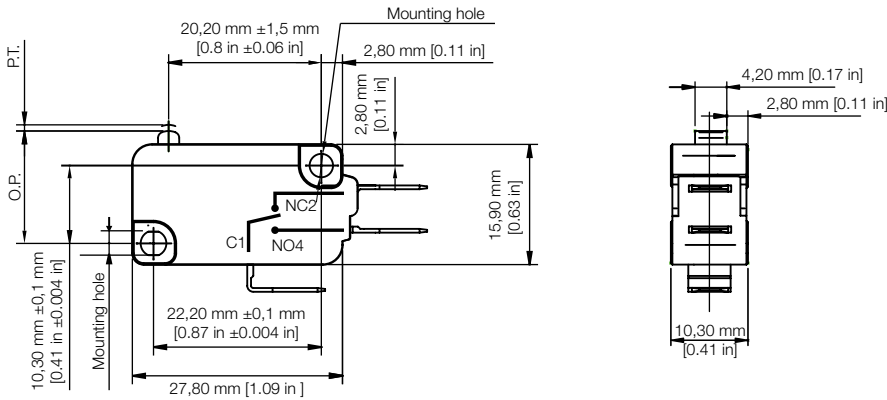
V15 Series Metric Mounting Hole Dimensions for Ø 3 mm pins or screws
